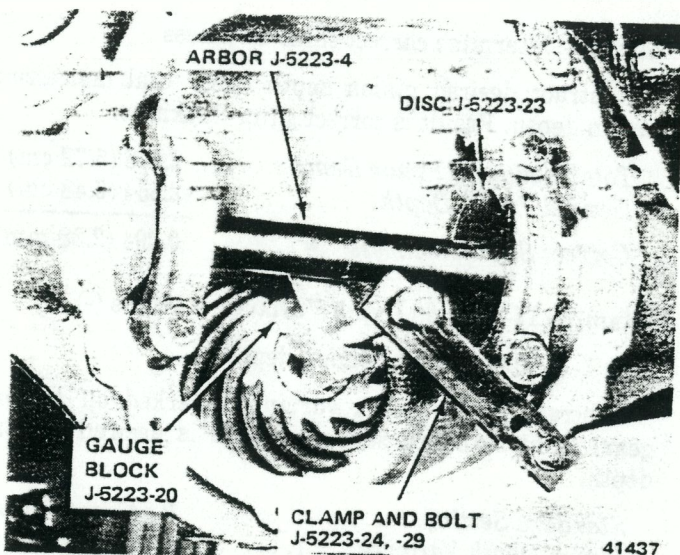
F-38 Installing Pinion Depth Gauge Tools
